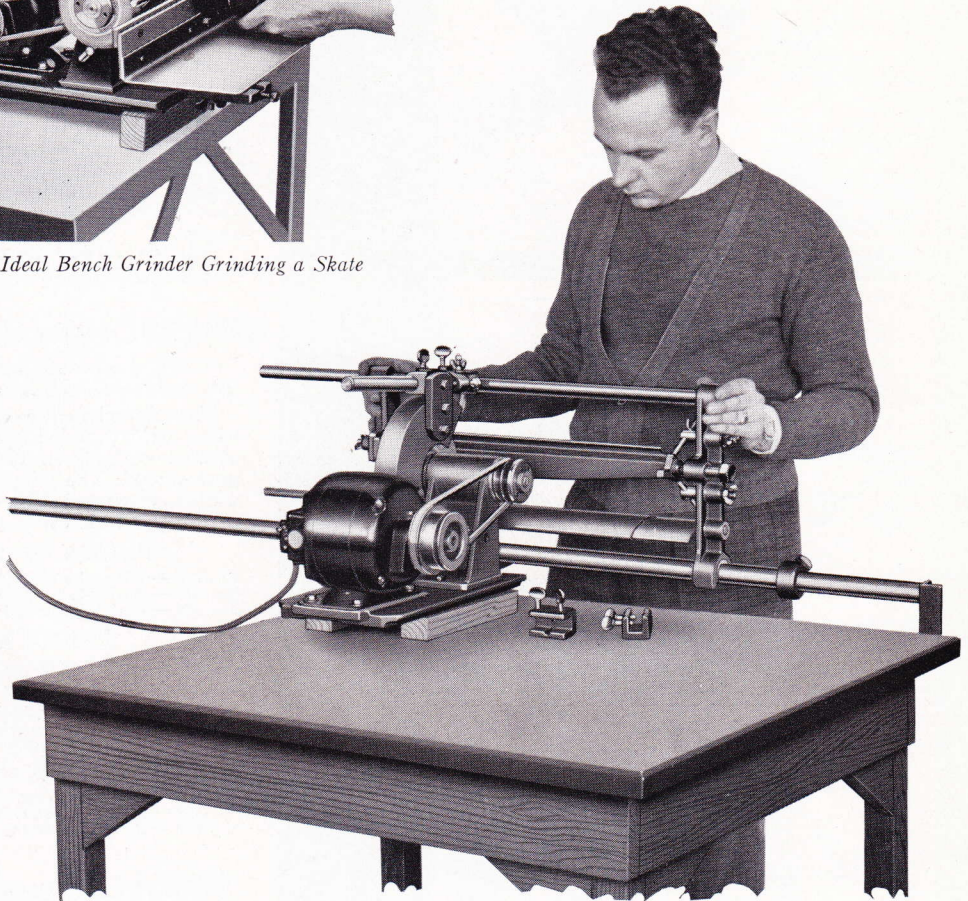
Ideal Bench Grinder Grinding a Lawnmower Straight Blade
